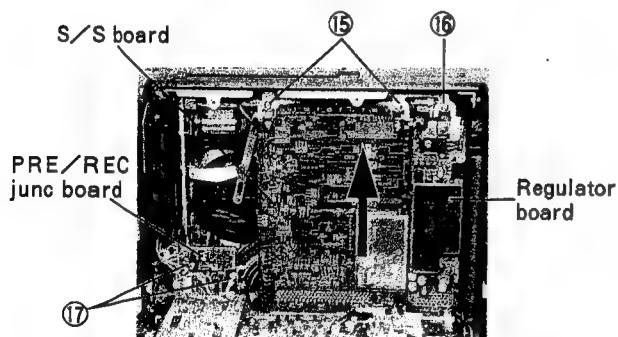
Removal of S/S, Regulator, PRE/REC junc board
